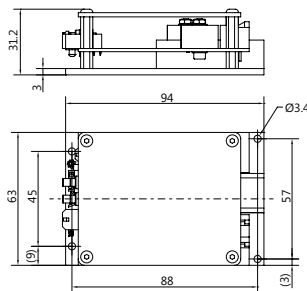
Outline drawing of DP-SP series drivers with conductive pad
